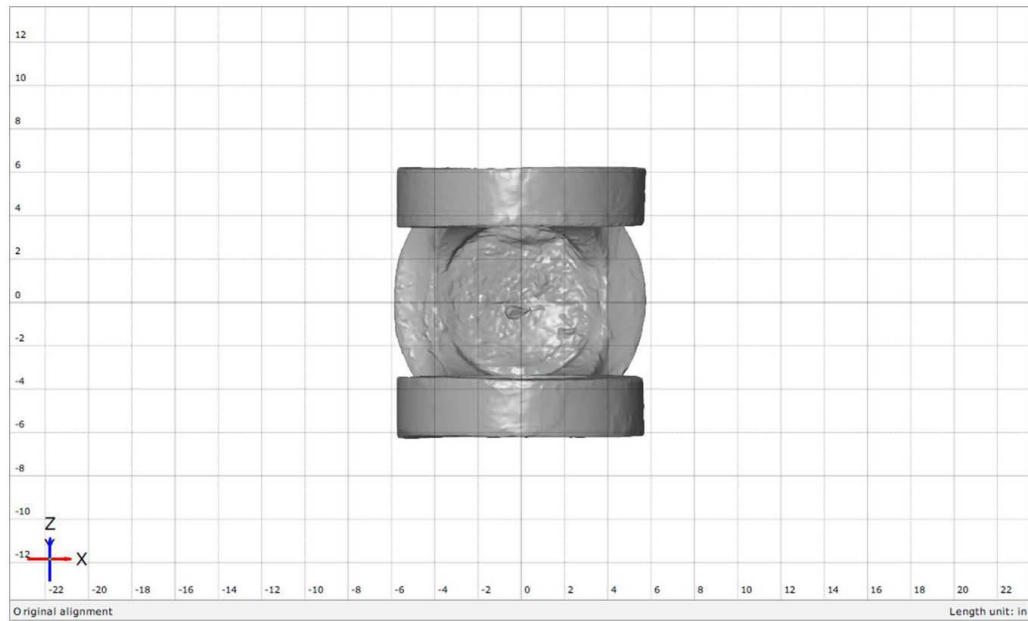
Laser scan of the as-received M4N socket, casting cap view with the top of the socket on the right side of this image.
